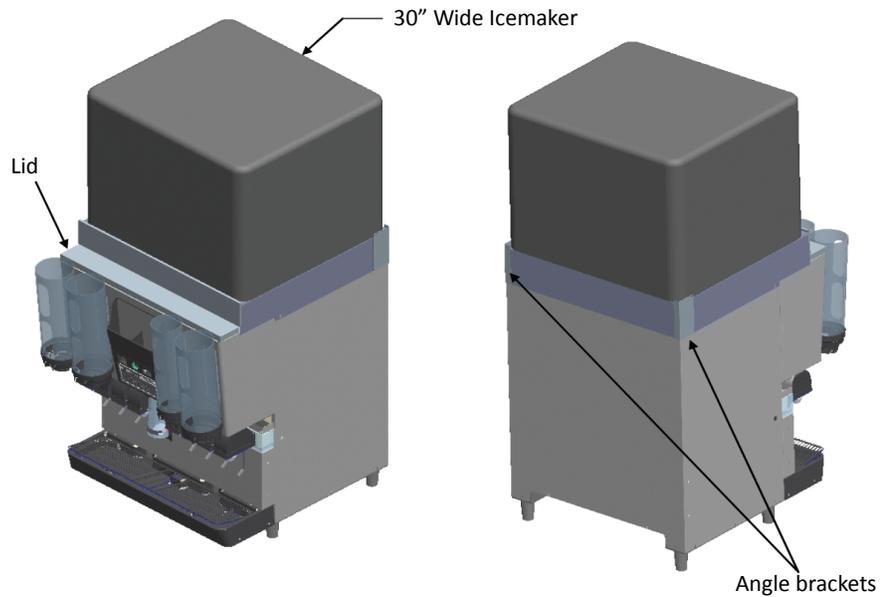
Front and Rear Views of 30\" Wide Assembled Unit
